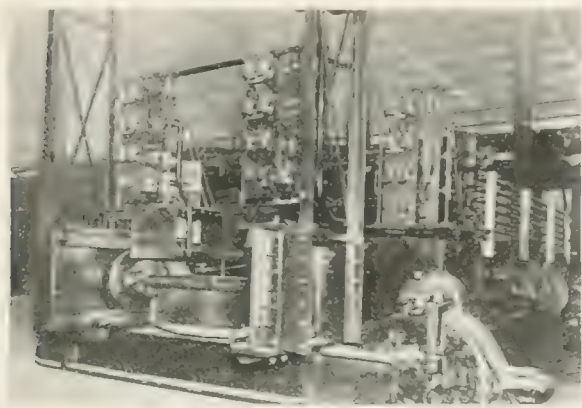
END VIEW OF CHARGING MACHINE OF FIG. 3, SHOWING CONTROL APPARATUS
